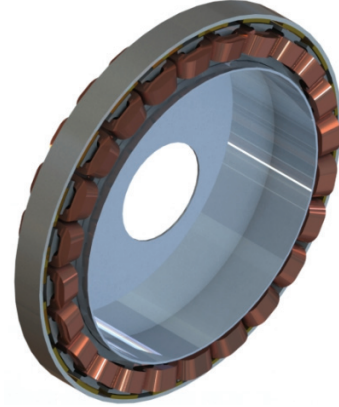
Designed 6 kW BLDC outer-runner motor.
